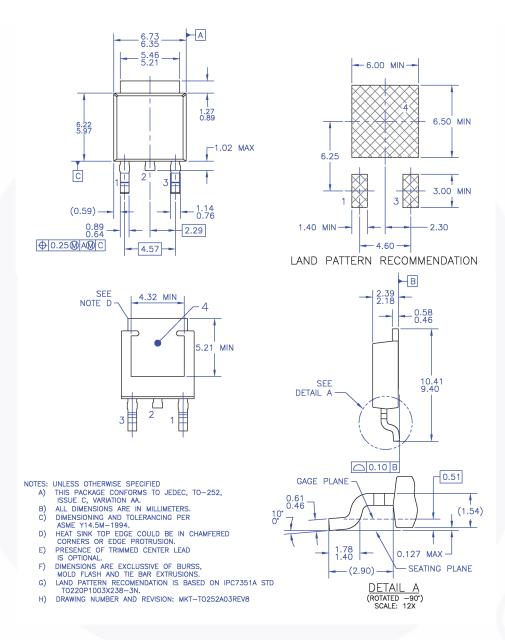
TO252 (D-PAK), Molded, 3-Lead, Option AA&AB
